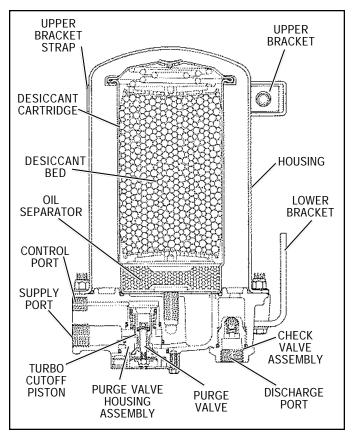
AD-9[™] AIR DRYER SECTIONAL VIEW
